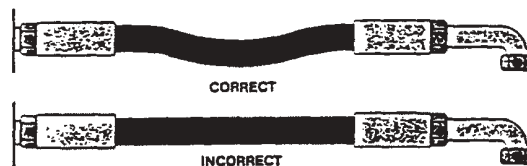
HOSE AND MACHINE TOLERANCES
